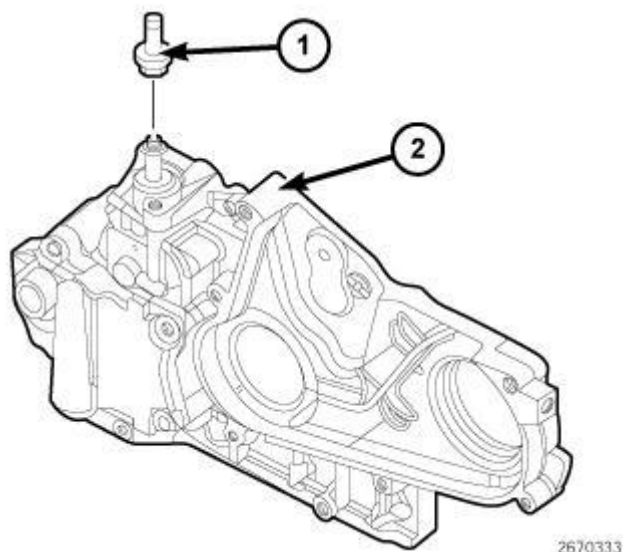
Vacuum Pump Check Valve & Front Engine Cover
